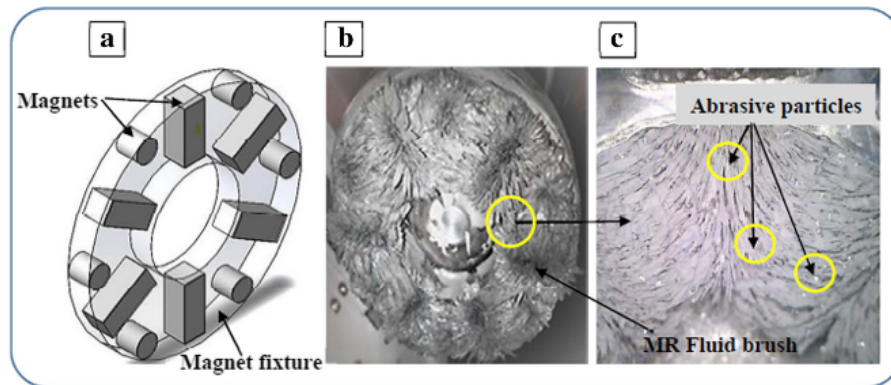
a) Magnetic fixture used for polishing, b) Photographic view of tool with the segregated MR finishing fluid and c) Magnified view of MR fluid brushes and abrasives [15]
